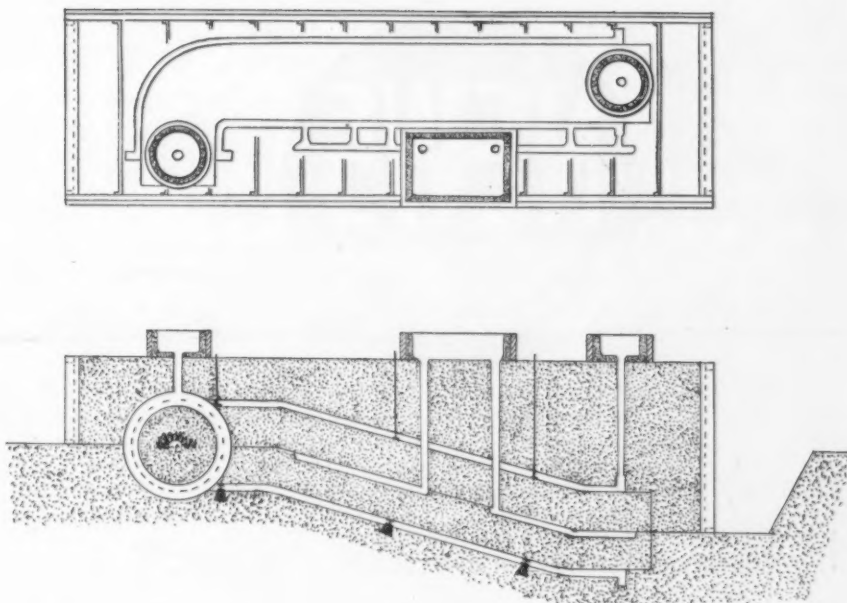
Assembled mold in plan and section, showing gating, risers and chaplet arrangement.
